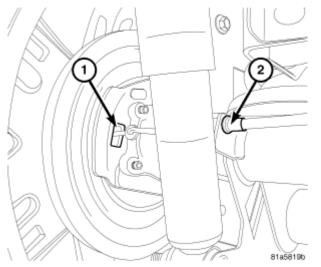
Identifying Brake Lever & Brake Cable Courtesy of CHRYSLER LLC
